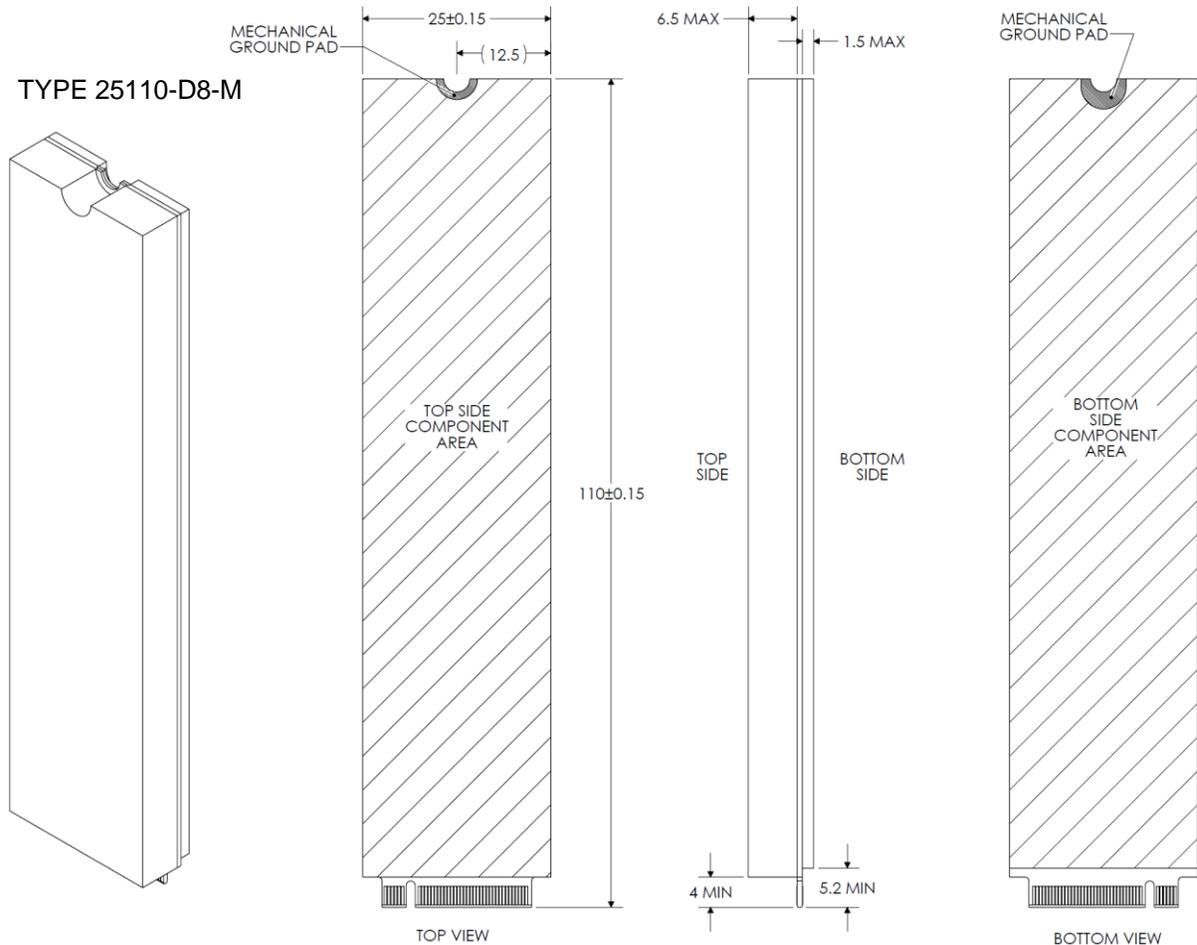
Type 25110-D8-M Mechanical Outline Drawing (Key M example shown)
